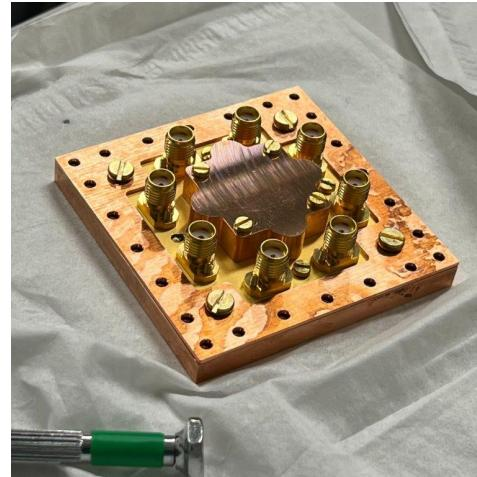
Tool for widening the holes for the SMA screws to fit in the PCB.
